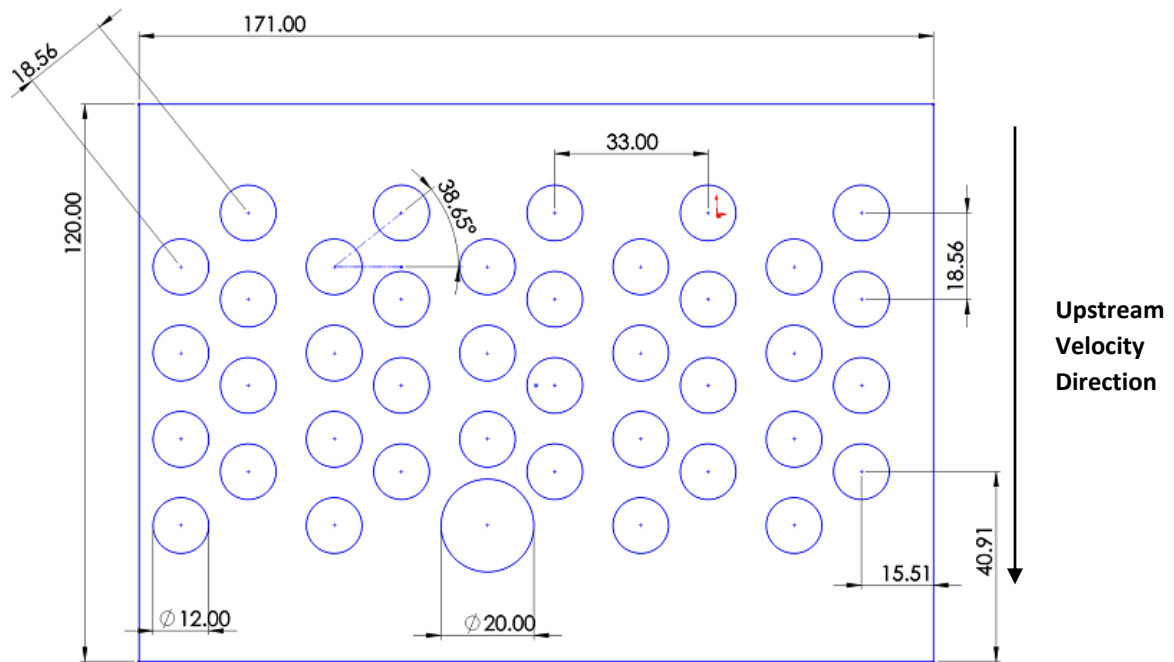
TRIANGULAR PARALLEL ARRAYS TUBE BUNDLE SPACER PLATE DIMENSIONS
